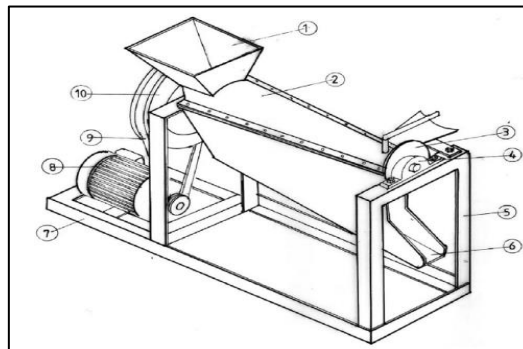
Isometric view of orange pulp extractor: 1 Hopper; 2 Extraction Chamber; 3 Dic plate; 4 Bearing; 5 Main frame; 6 Juice collector; 7 Motor stand; 8 Electric motor; 9 Transmission belt; 10 Pulley [50]
